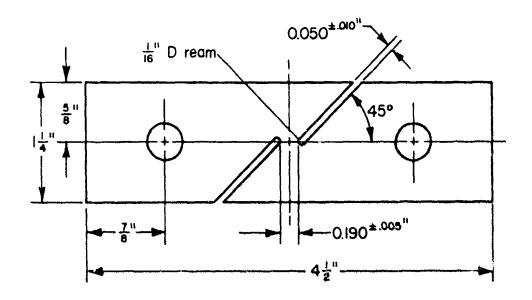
SHEET SHEAR TEST SPECIMEN
